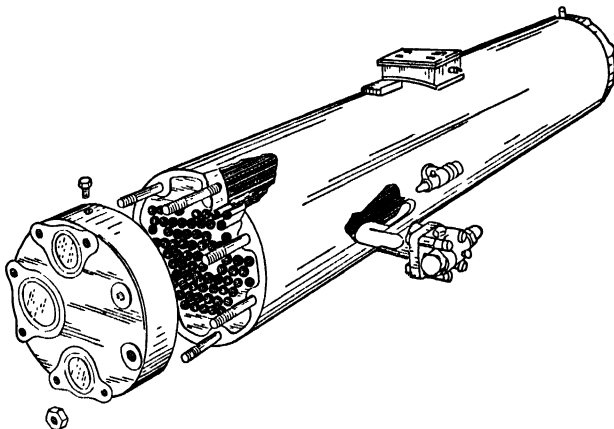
Shell-and-tube condenser. (Courtesy of Carrier Corporation)
